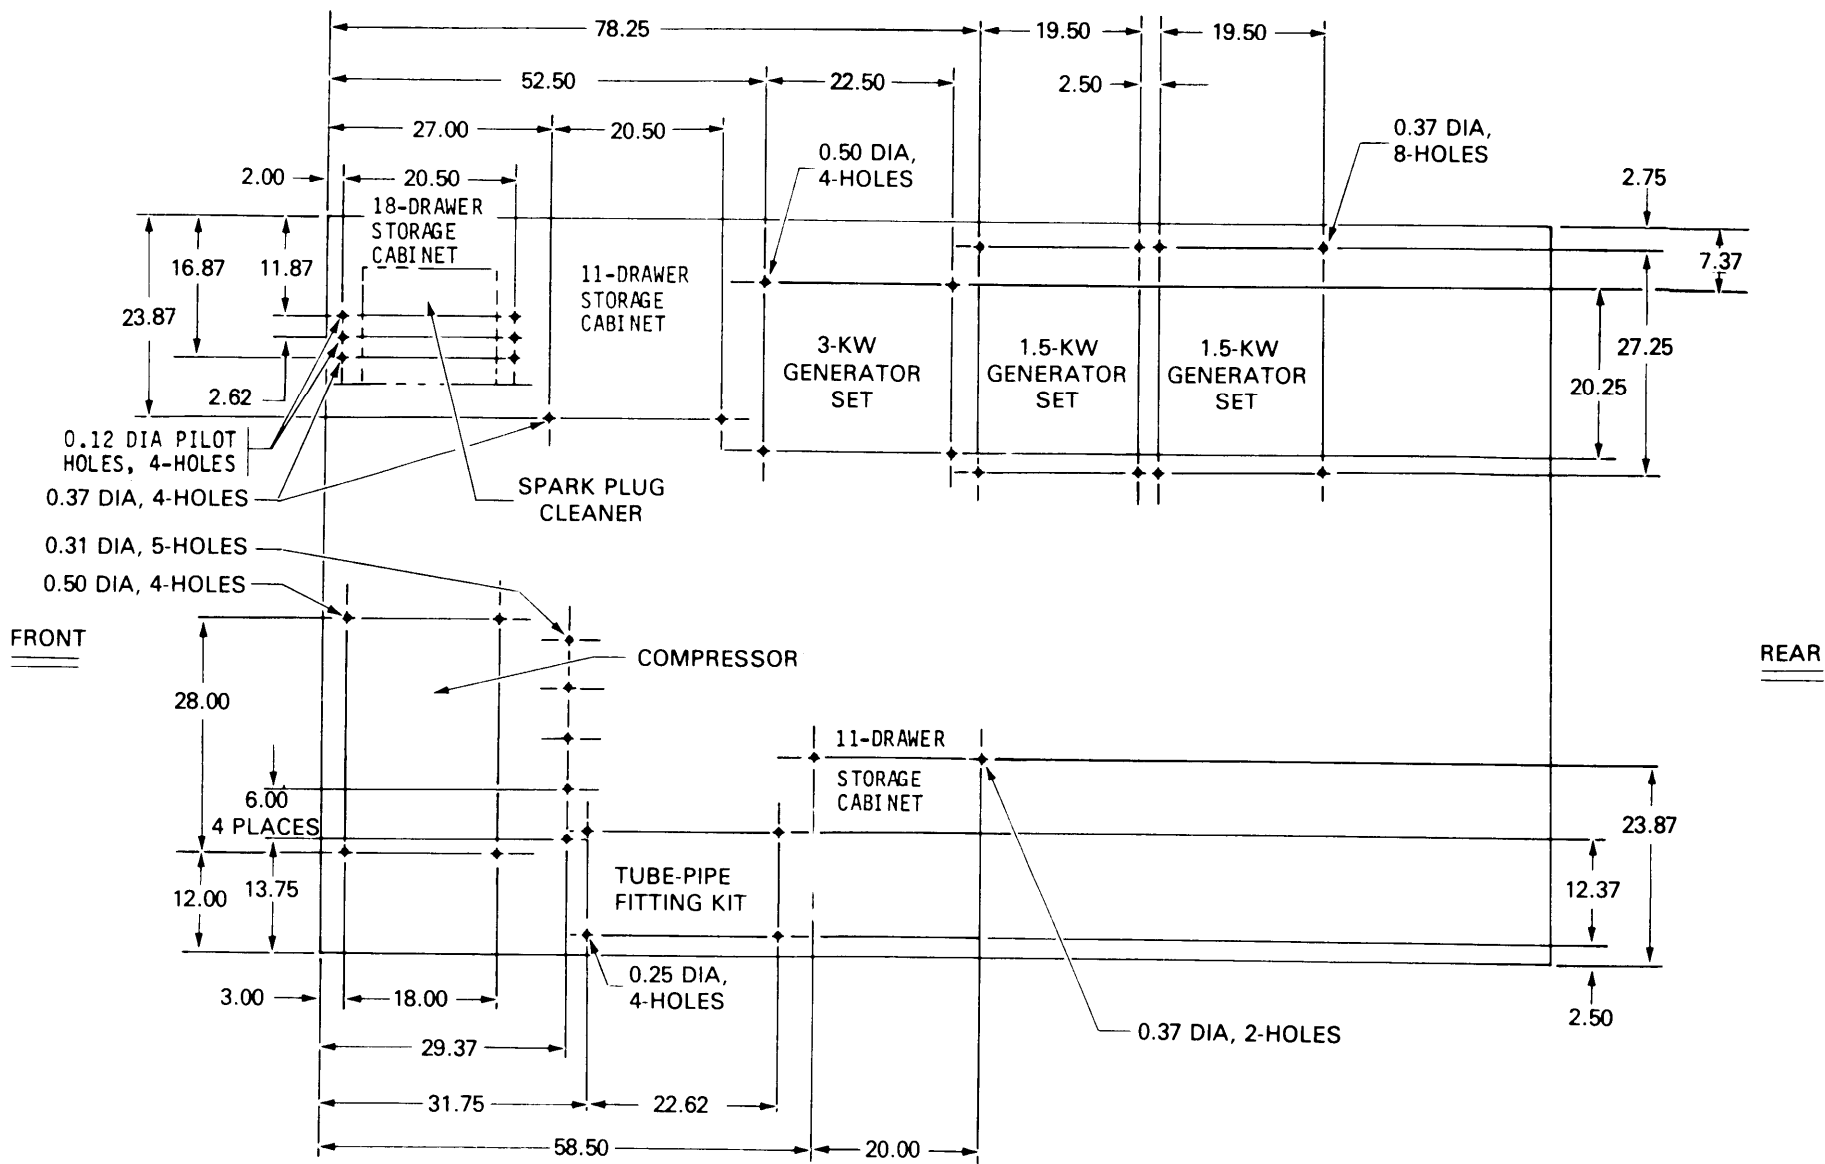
Hole Dimensions for Mounting Components, Unit 1, M35A2, Floor Plan.
